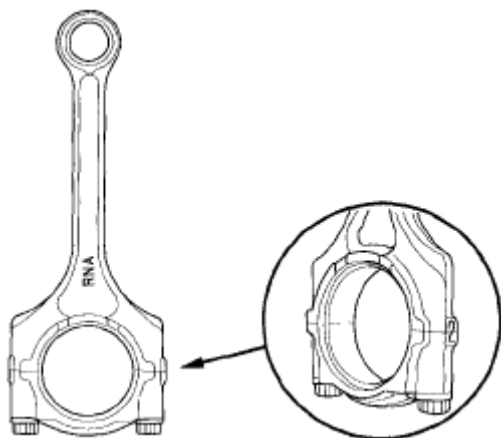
Identifying Connecting Rod Big End Bore Code Locations
